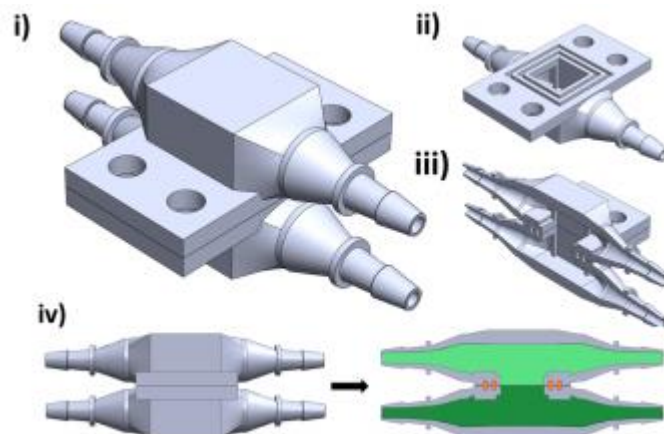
(i) The DCB is composed of two equal master parts that can be sealed together; (ii) the master parts is composed of an inlet, an outlet, and an open centerpiece, as well as including guide channels for
